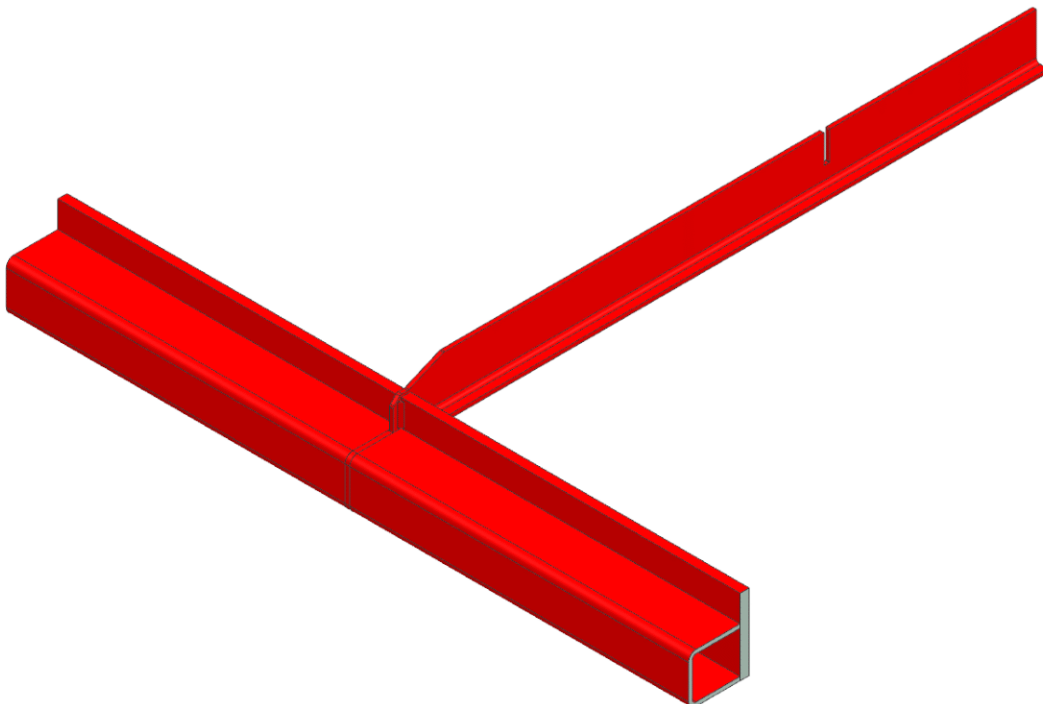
Idealized model used in analysis. The transverse beam is welded to the outside of the long side beam plate with two opposing fillet welds, each with a length of 35 mm and throat size of 3 mm.
